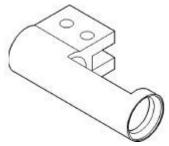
Valve Spring Adapter 6526 Courtesy of CHRYSLER LLC
